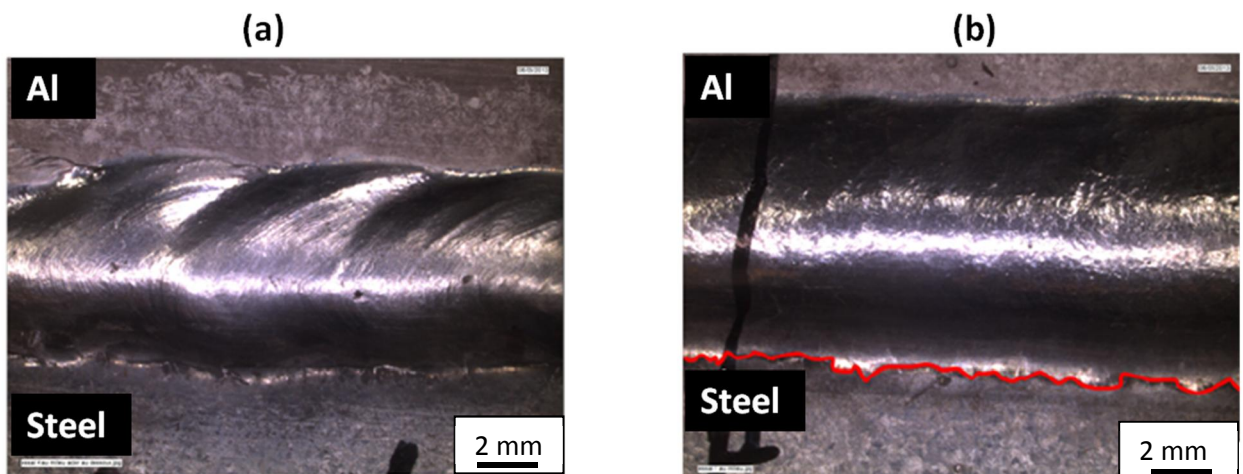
Visual aspect of the welds: (a) test 9, (b) test 6.
